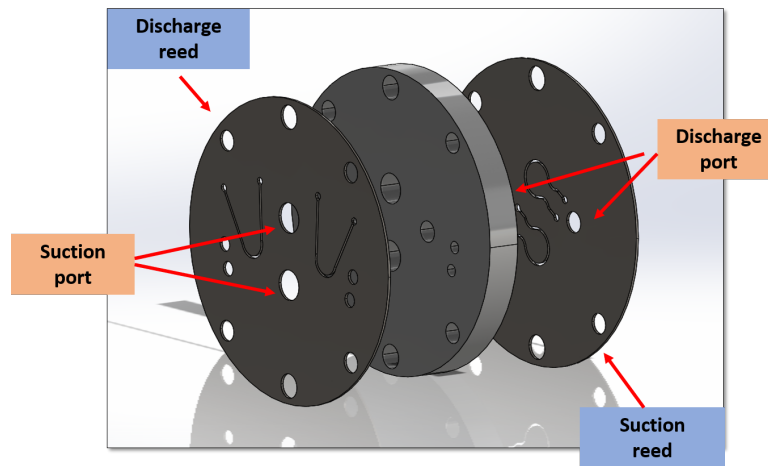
Drawing of the final valve assembly design in the prototype linear compressor.
